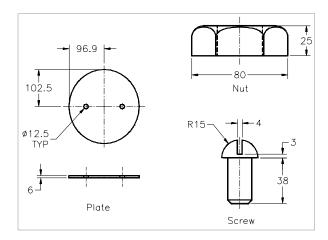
Dimensions of the Plate, Nut, and Screw
